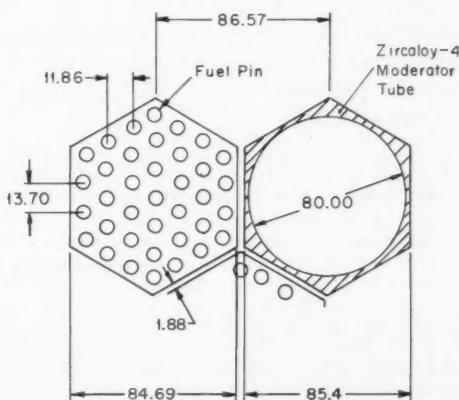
VULCAIN fuel assembly and moderator tube.⁴ (Dimensions are in millimeters.)
